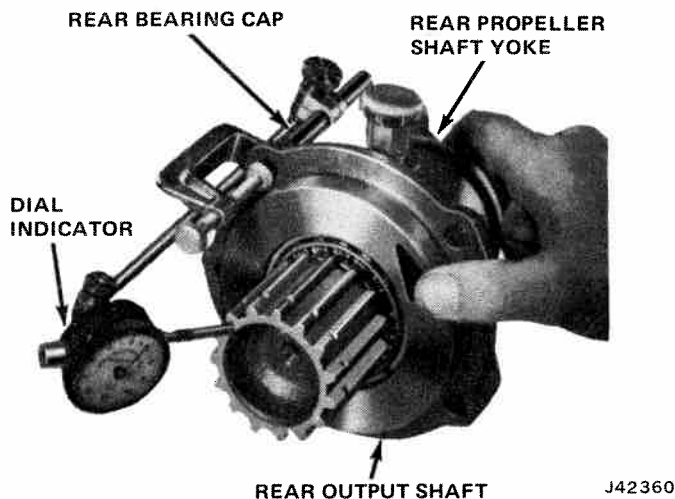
Checking Rear Output Shaft Bearing Adjustment
